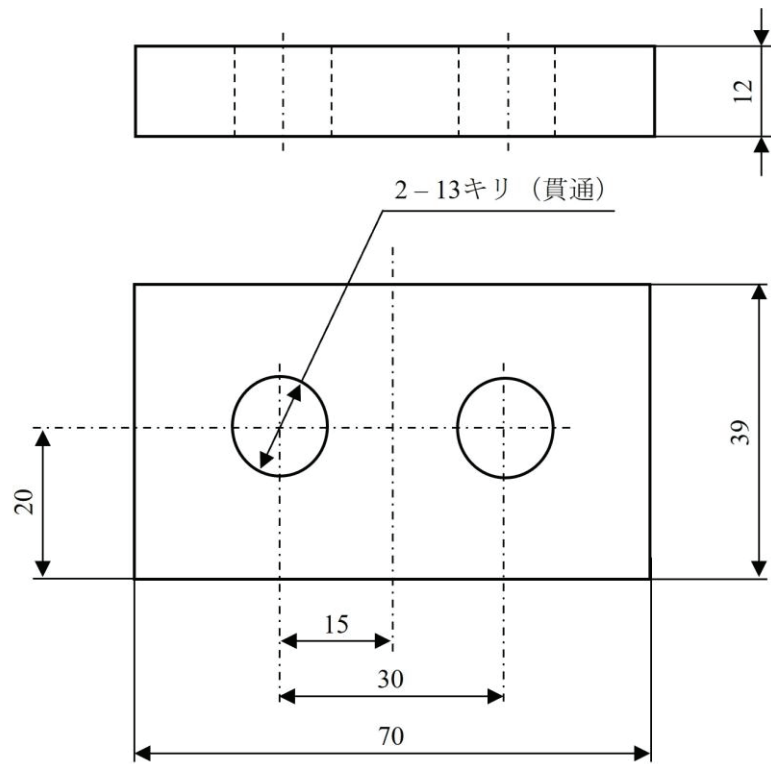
Jig3 for one-sided welding of the fillet joint (unit : mm)
